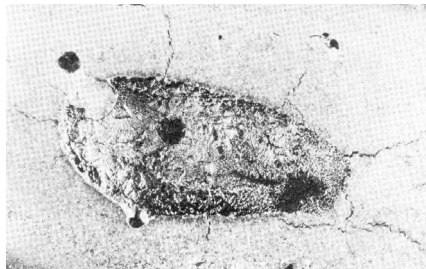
Welding arc strike. Cracks about 2 mm in size developed in hard heat-affected-zone (HAZ) surrounding fusion starter /6/
